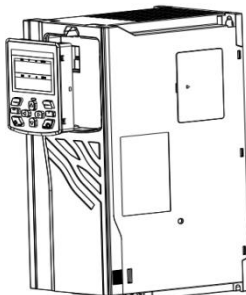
Schematic diagram of disassembly and assembly of keypad
